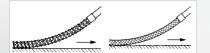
External protection via round wire coil or protective hose for hose assemblies (at top) subject to heavy mechanical loads and non-approved use of an unprotected hose assembly (at bottom).
